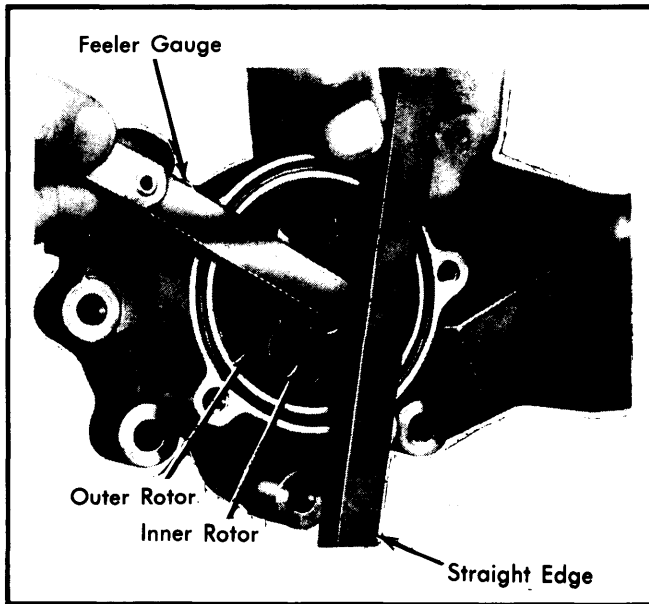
Making Rotor Clearance Measurement with Feeler Gauge and Straightedge
